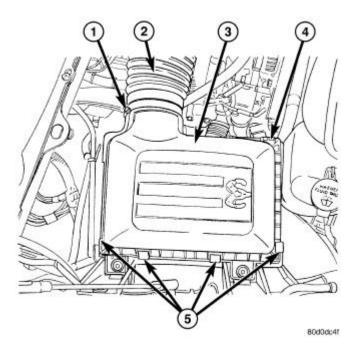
Removing/Installing Air Cleaner Housing Cover Courtesy of CHRYSLER LLC
